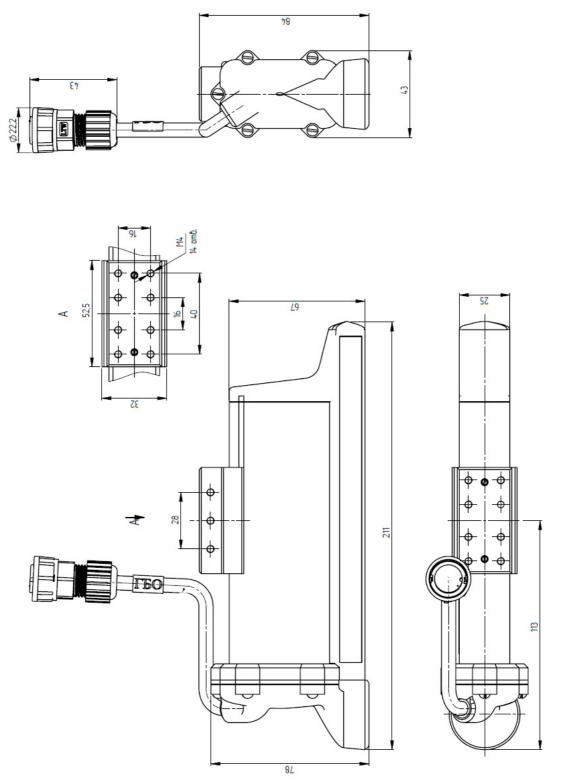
Monoblock outline drawing (version with bracket for AUSV)
